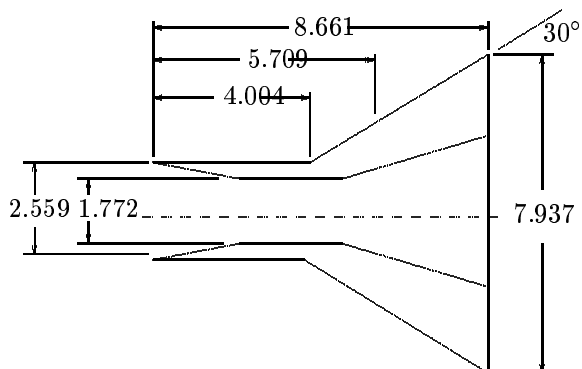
Hollow cylinder with long flare (dimensions in inches)
